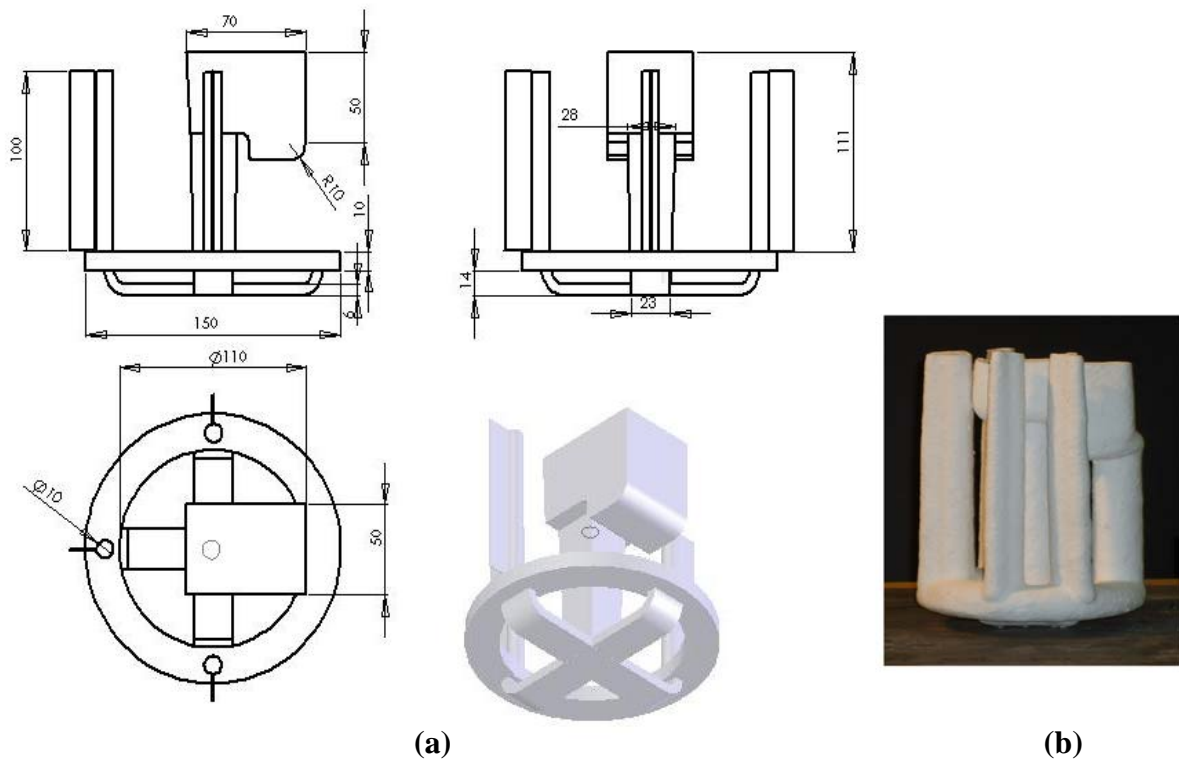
(a) Mould design for filling capability test (b) ceramic mould
